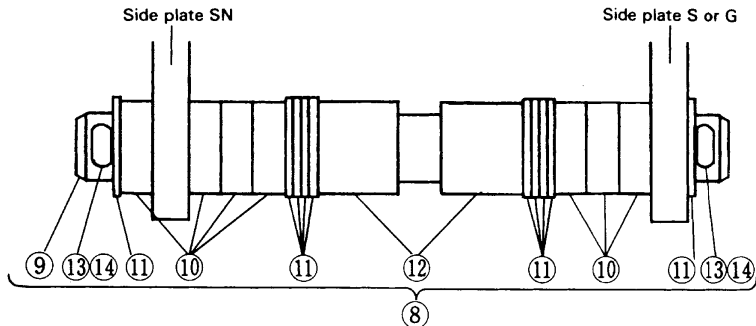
Suspension shaft W30 assembly. (5 t)
